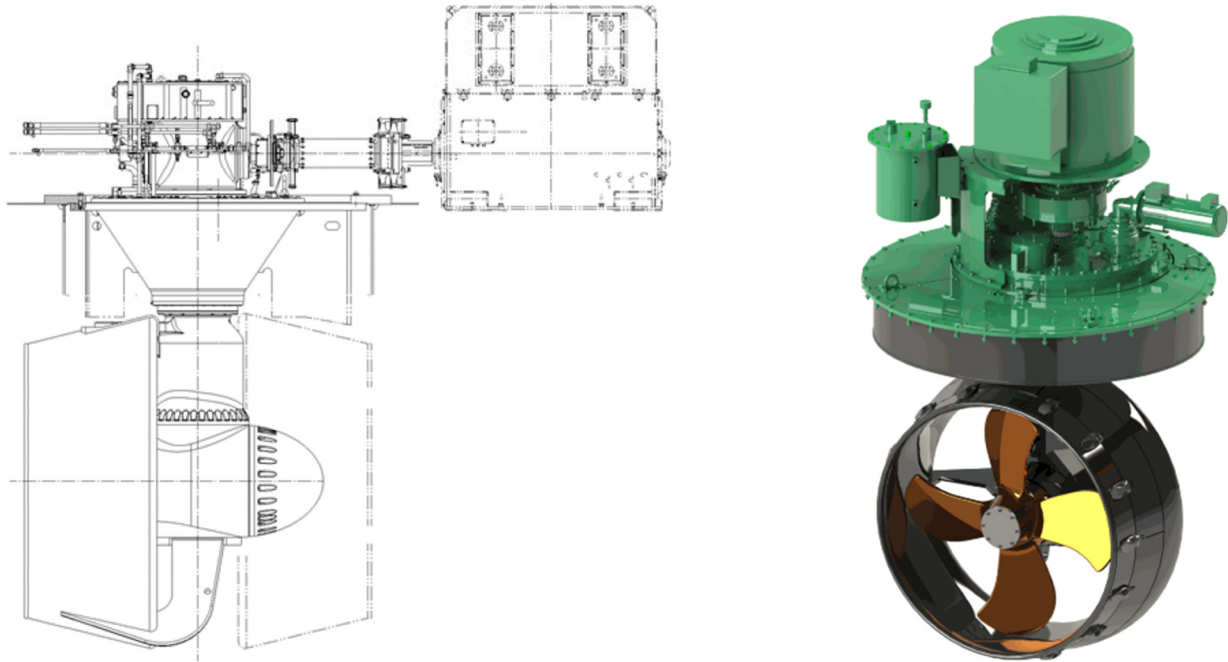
Azimuthing drives: Z-drive (left) and L-drive (right)
